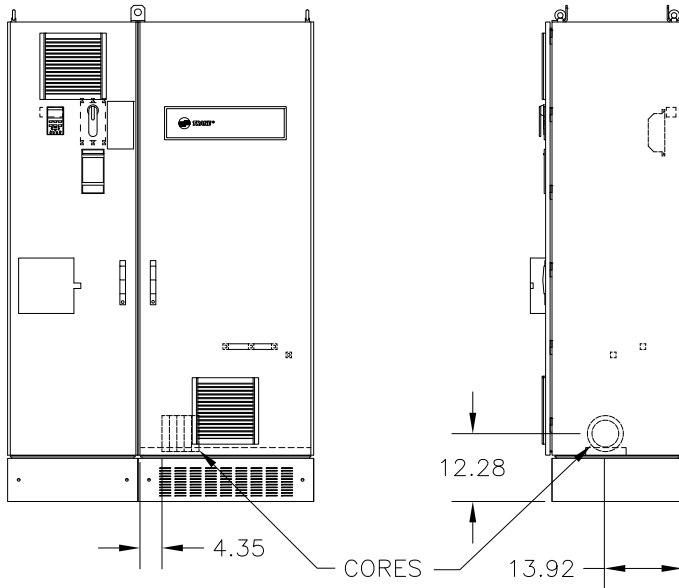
AFDG Remote-Mounted Drive (Frame F3 and F4)
